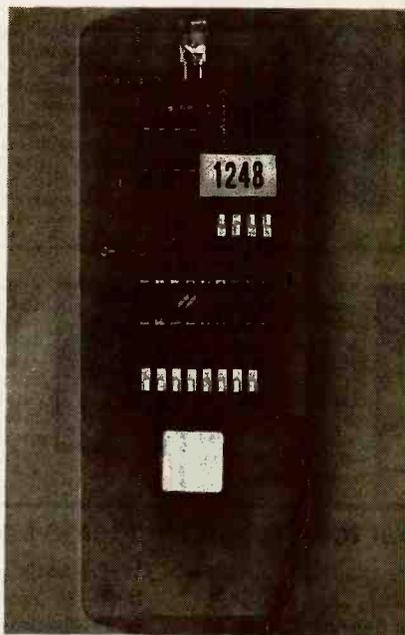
COMPLETED TRANSMITTER BOARD. This board allows unique coding that won't interfere with nearby remote-controlled equipment.
